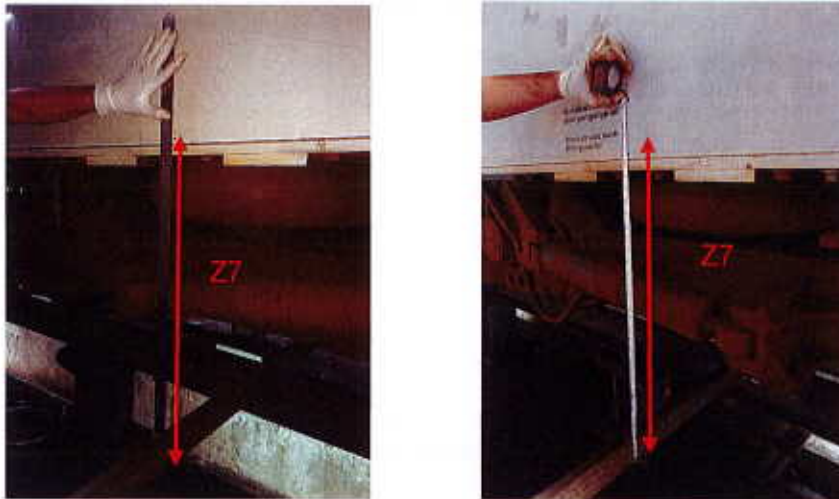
Measuring of Z7 (using measuring tape or steel ruler)
